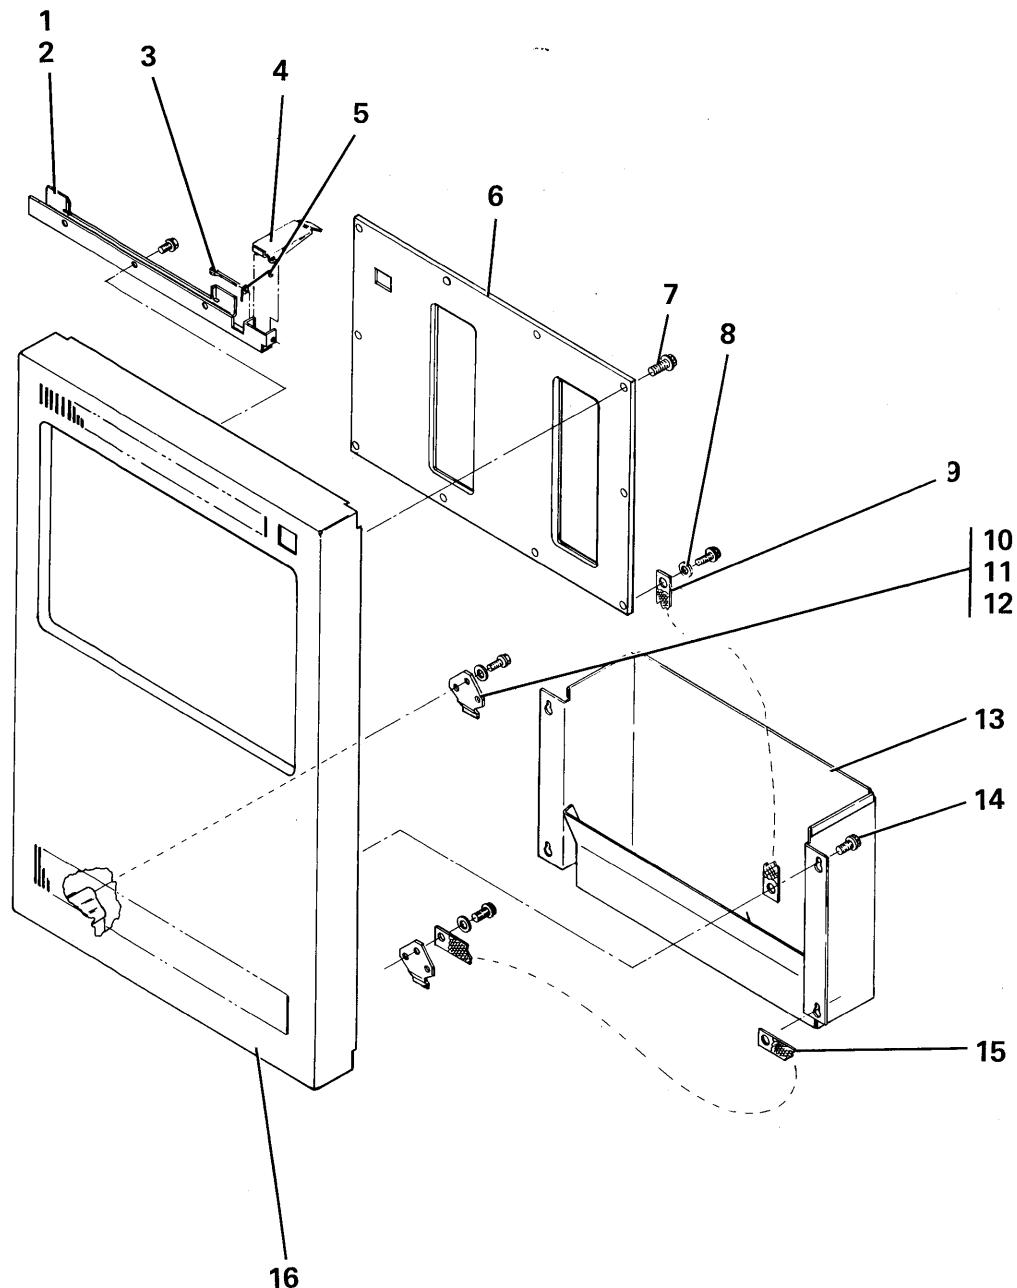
FRONT DOOR ASSEMBLY. SEE LIST 2.
